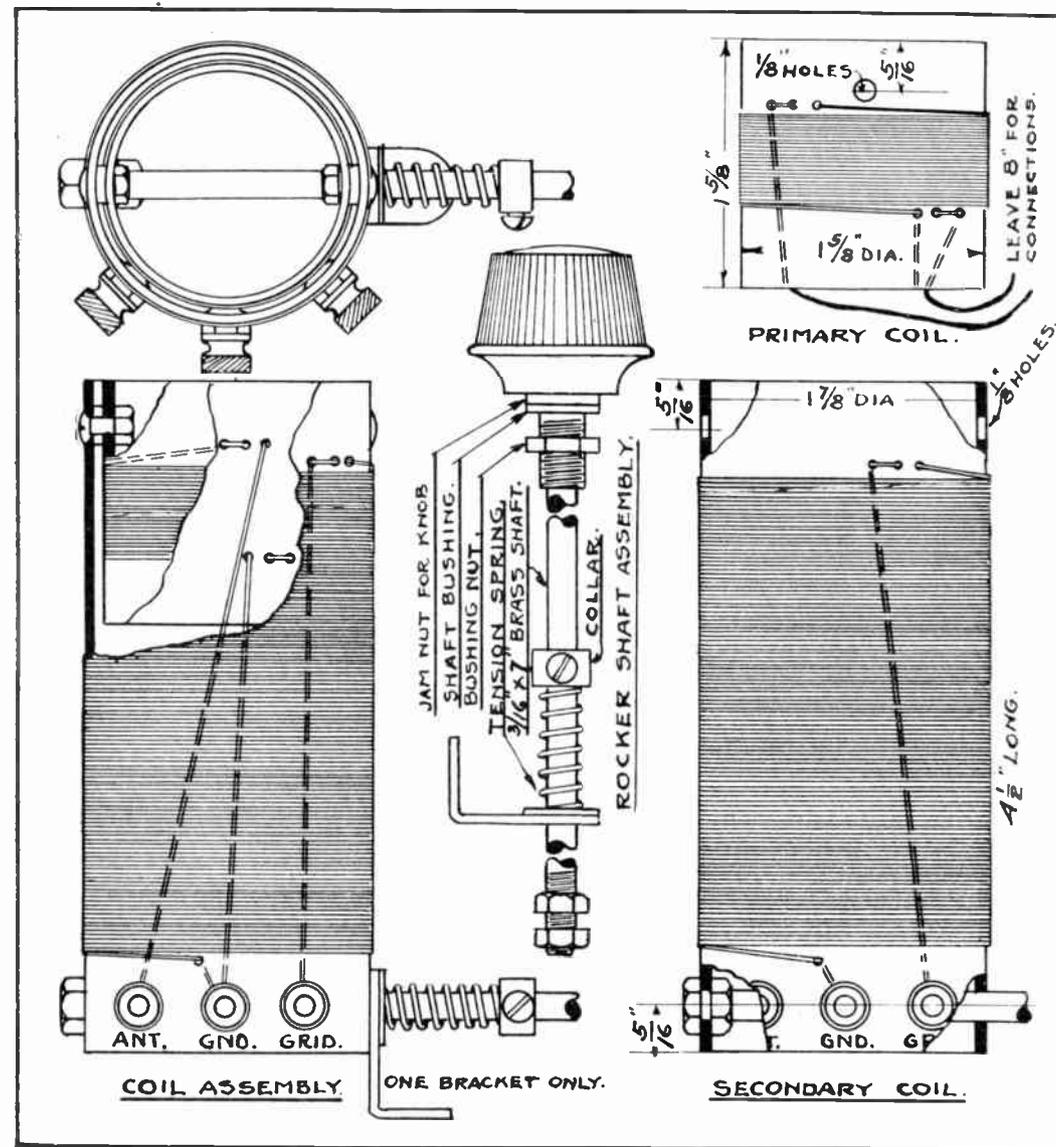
Detailed Drawing of Coil No. 1 for Duston Special
